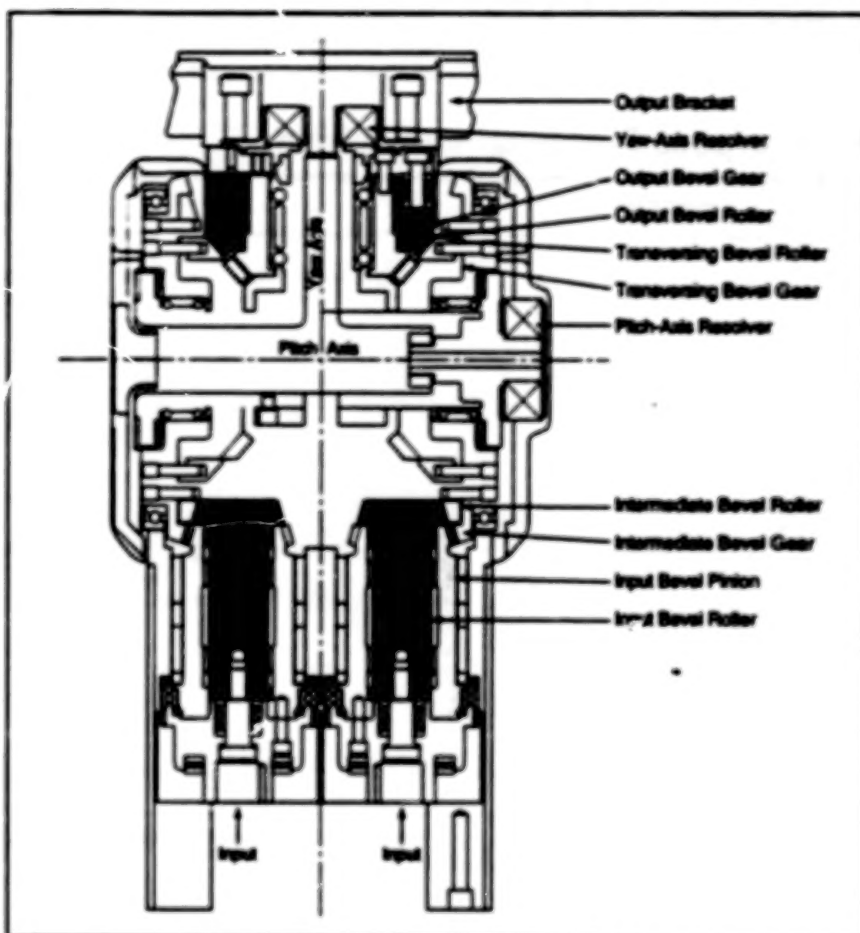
The Pitch/Yaw Drive is a novel two-axis drive that contains a combination of gears, rollers, and springs that act together to eliminate backlash and cogging.
